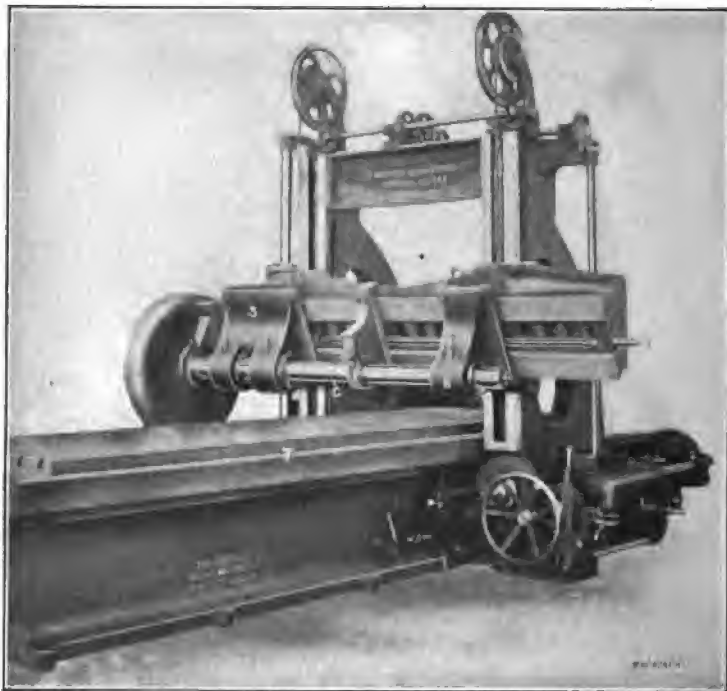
Ingersoll Horizontal or Planer-type Milling Machine
